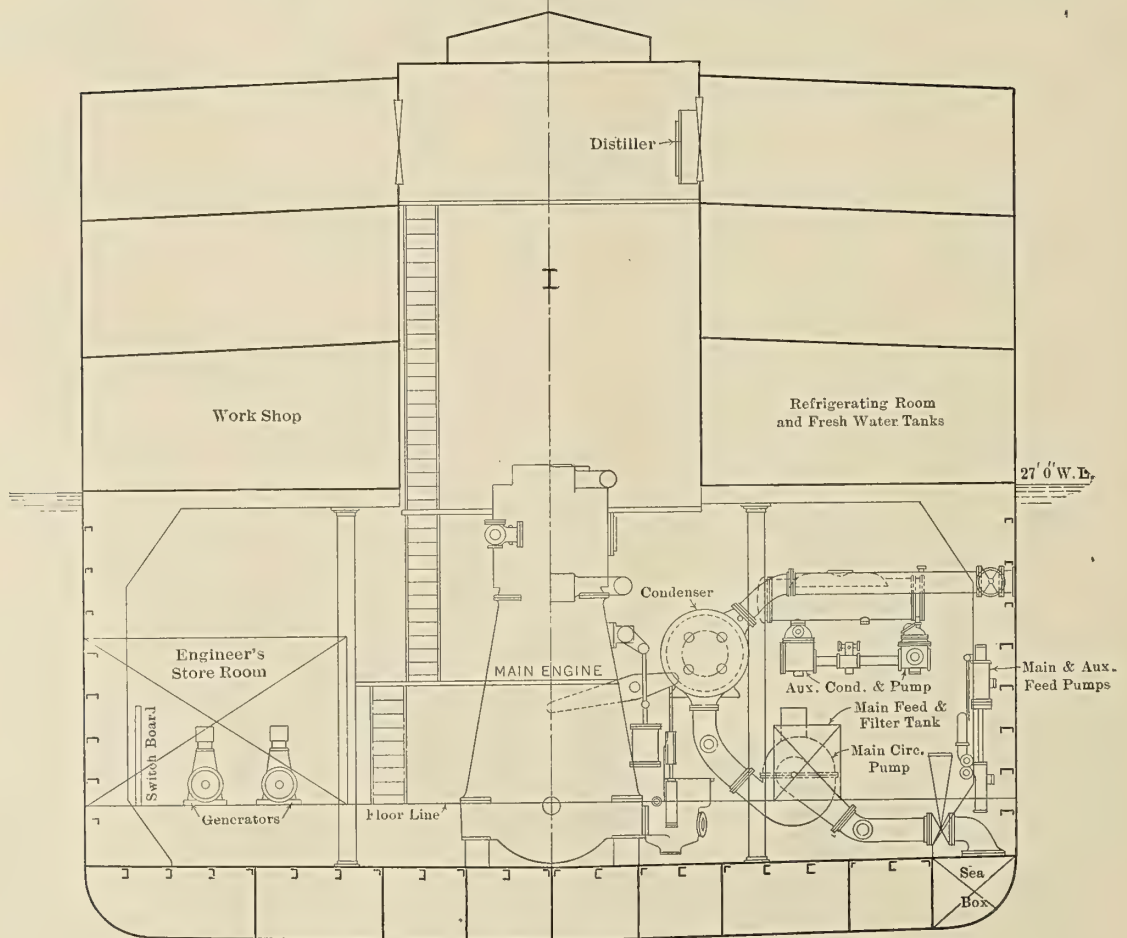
Sections Through Boiler and Engine Rooms of 9,600-Ton Turbine-Driven Cargo Steamer
